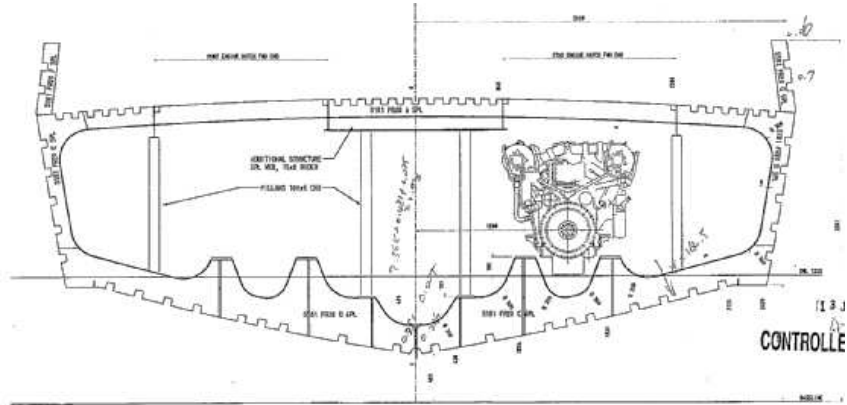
Front view of the structural arrangement of the supporting pillars, the side engines, the shape of the engine bed cross sections and the associated frame (Frame 20). Looking forwards to the bow.
